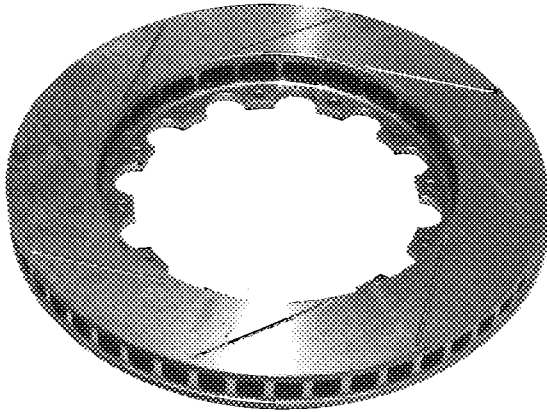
FRONT AND/OR REAR BRAKE DISC TYPE 3
